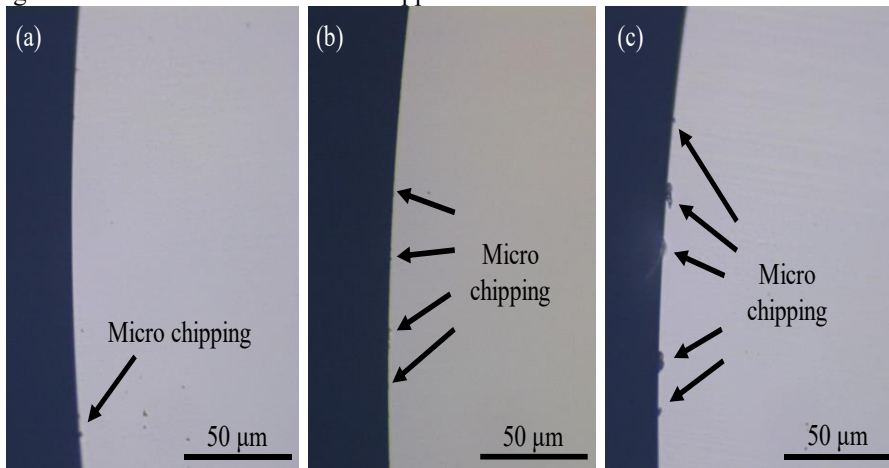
Tool wear. (a) 10 mm/s, (b) 20 mm/s and (c) 30 mm/s
